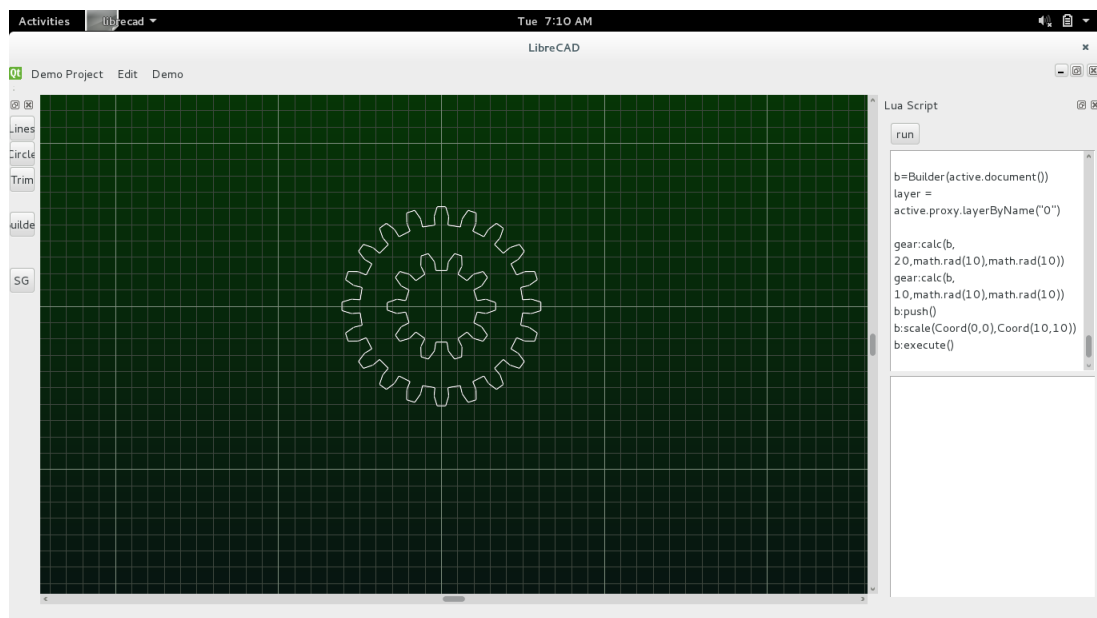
Gear module drawn using LibreCAD 3 scripting.
